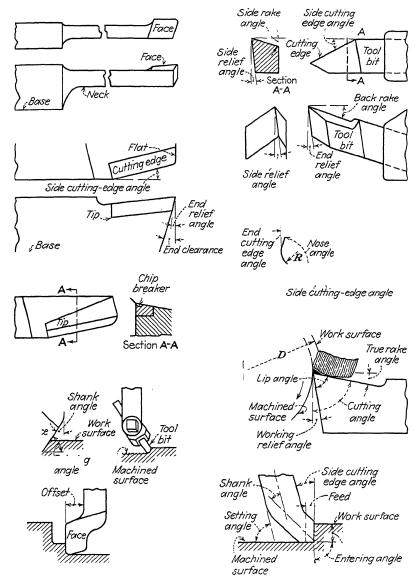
Single-point cutting tool, types and angles. (Mechanical Engineering.)
